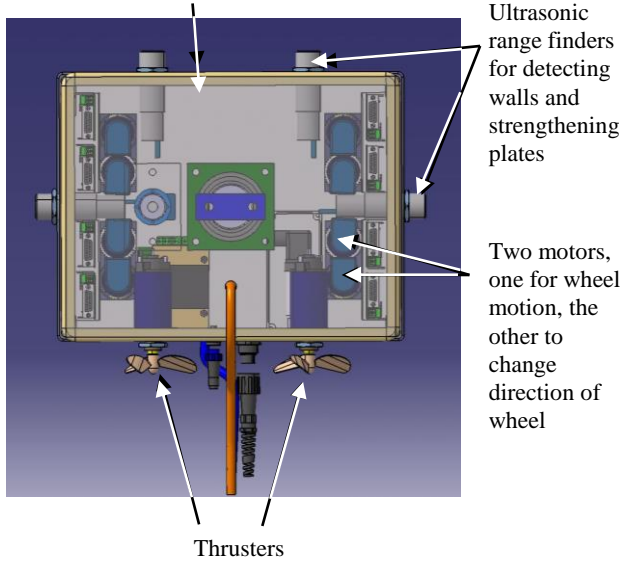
Plan view of the robot showing location of ultrasonic range sensors and the six drive motors and two thruster motors
